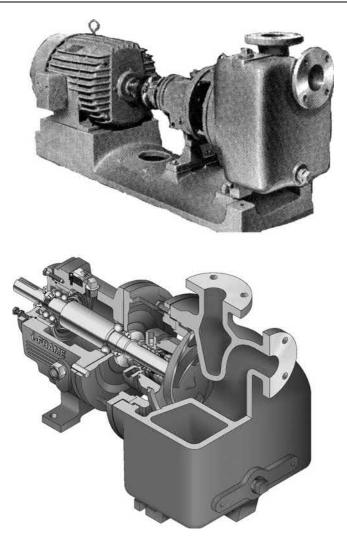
Horizontal, single-stage, self-priming, ANSI B73.1 pump. (Top) Assembled; (bottom) sectional. Courtesy of Goulds Pumps, Inc.
